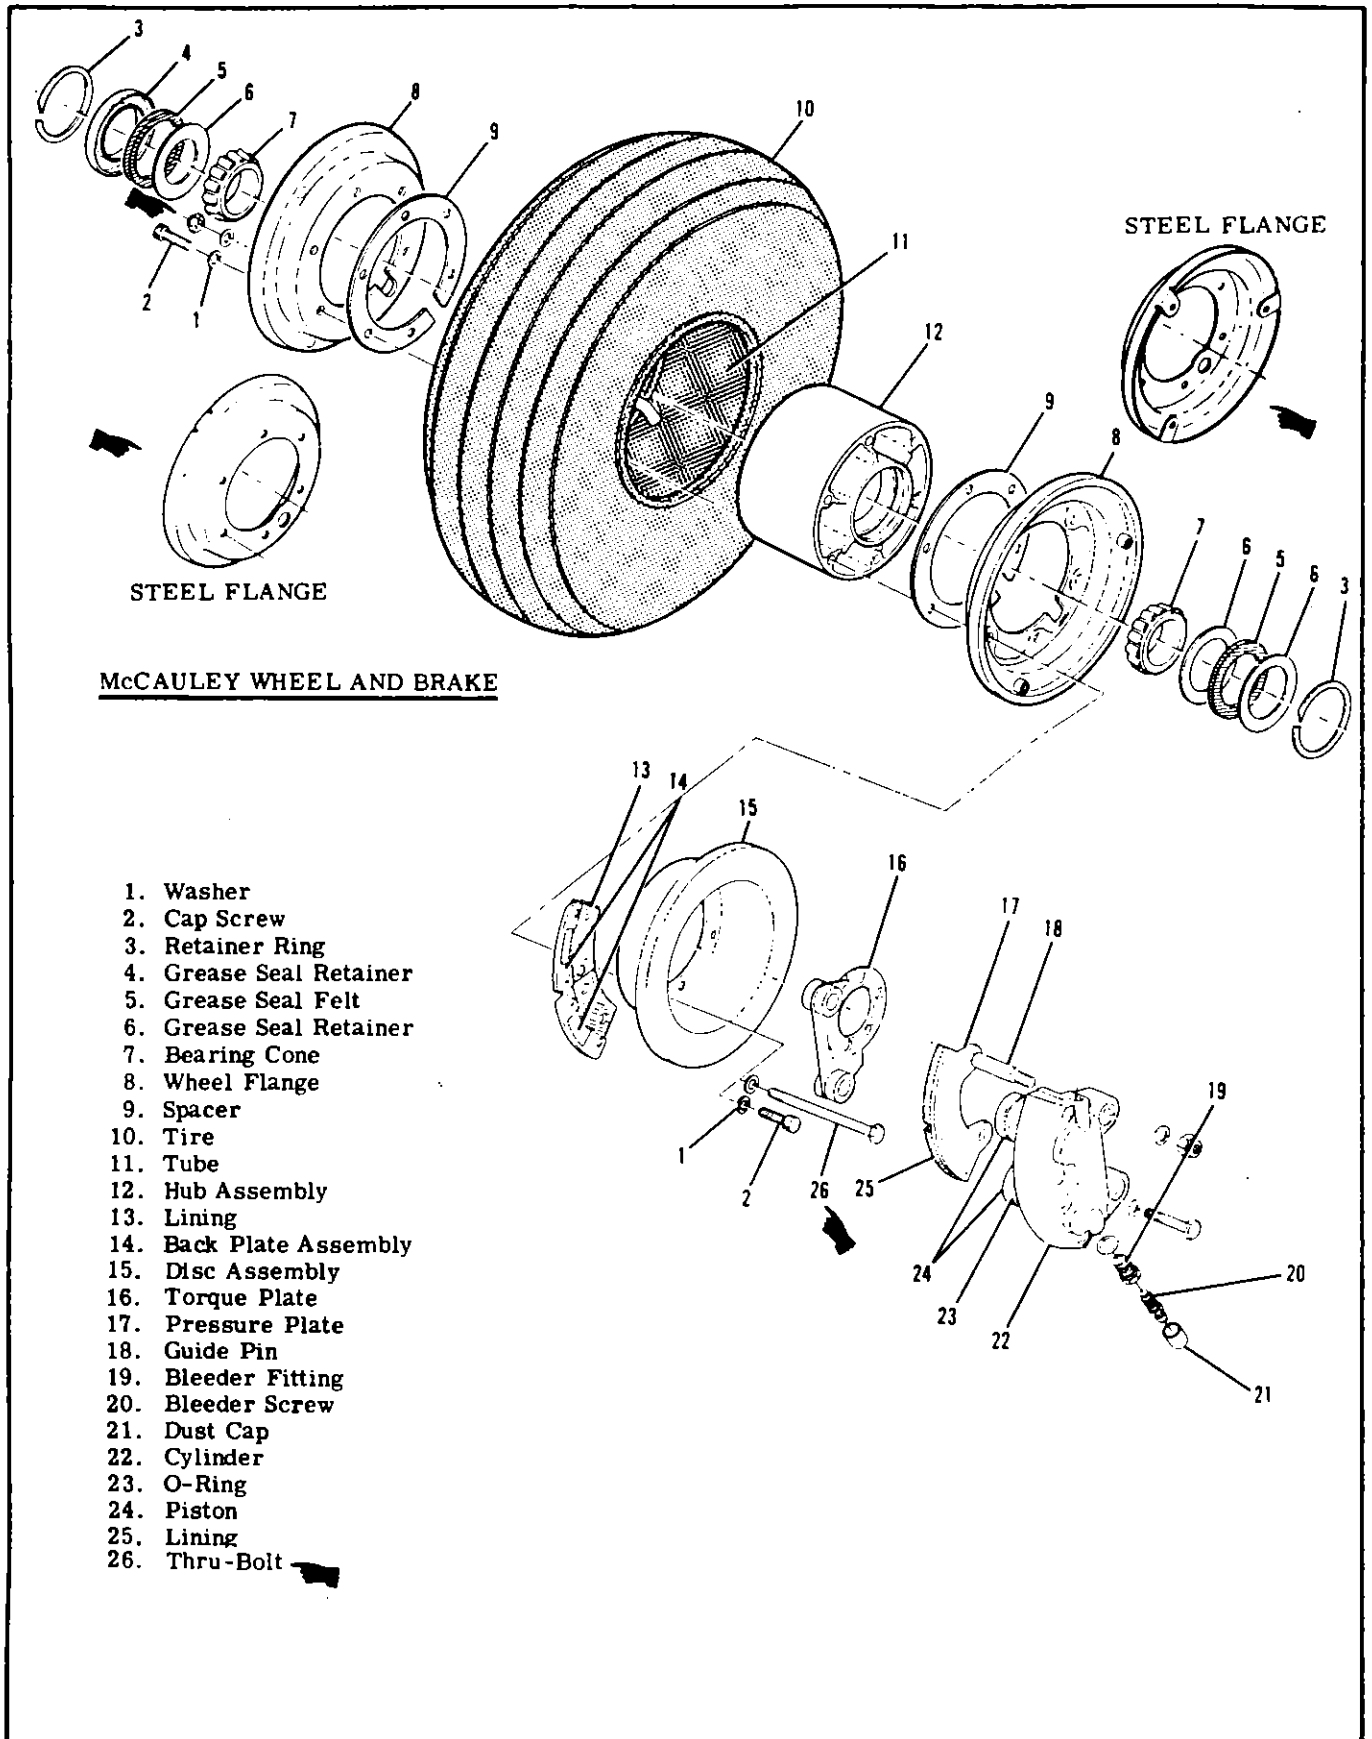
Wheels and Brakes (Sheet 2 of 2)
